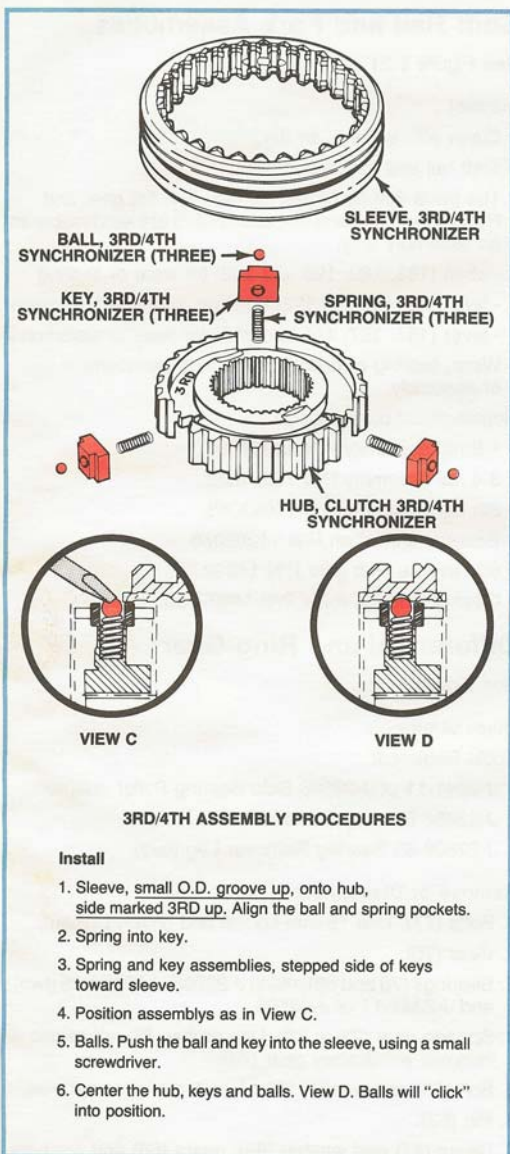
, 3rd/4th Gear Synchronizer Components.
